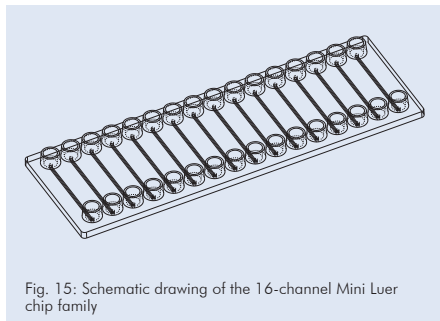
Schematic drawing of the 16-channel Mini Luer chip family
